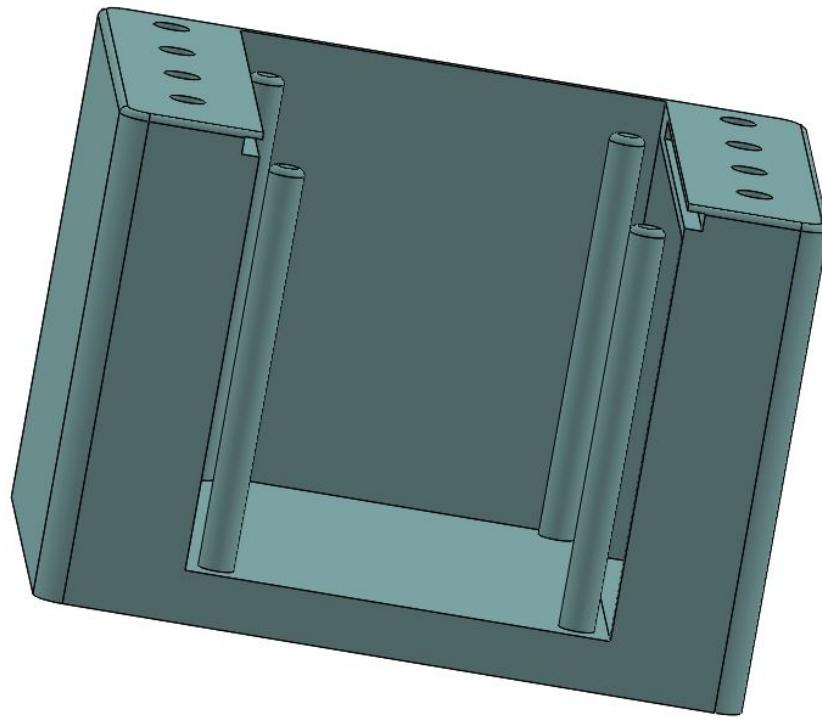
Ferrarer, Auston: Basic Cut Extrude
